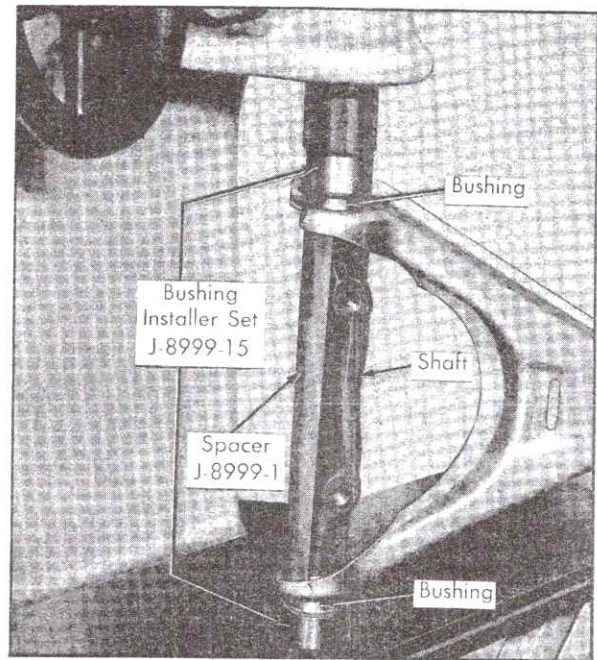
Installing Shaft and Bushing in Upper Arm
